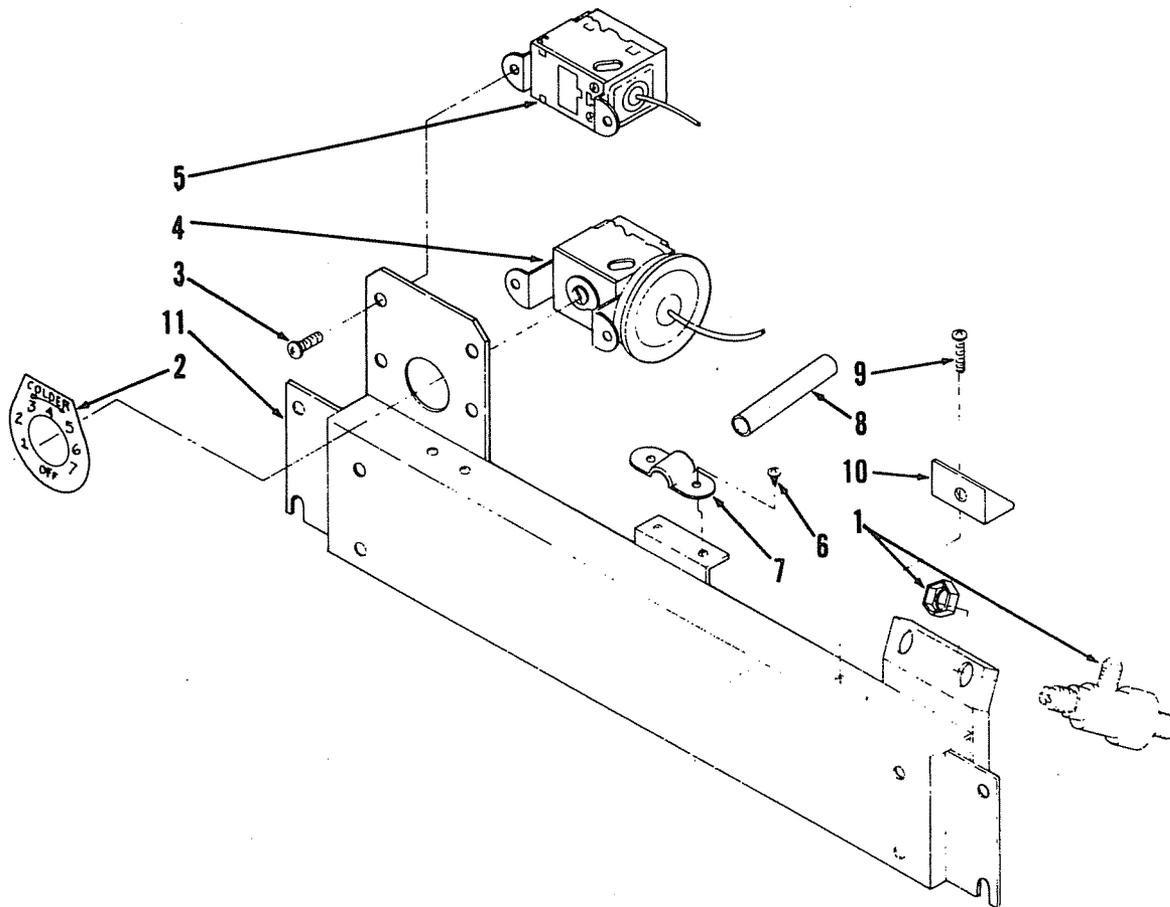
DRIP TRAY PANEL ASSEMBLY
